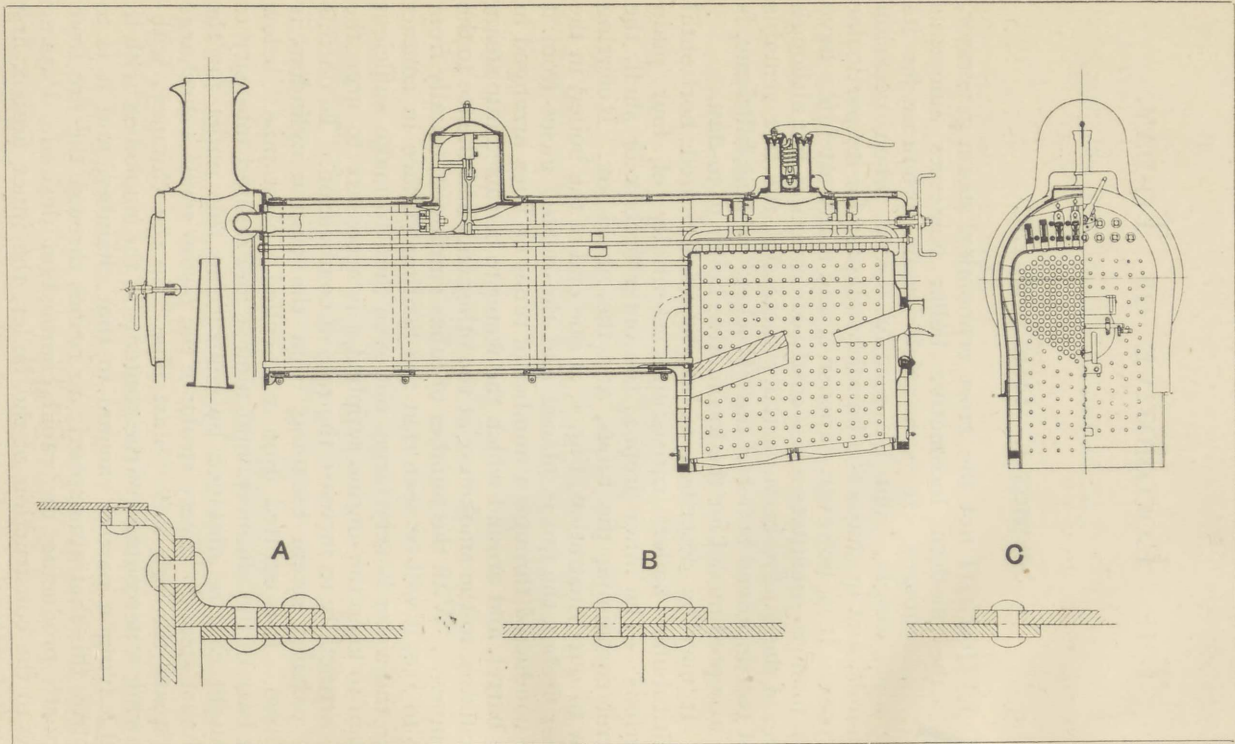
MODERN LOCOMOTIVE BOILER.
